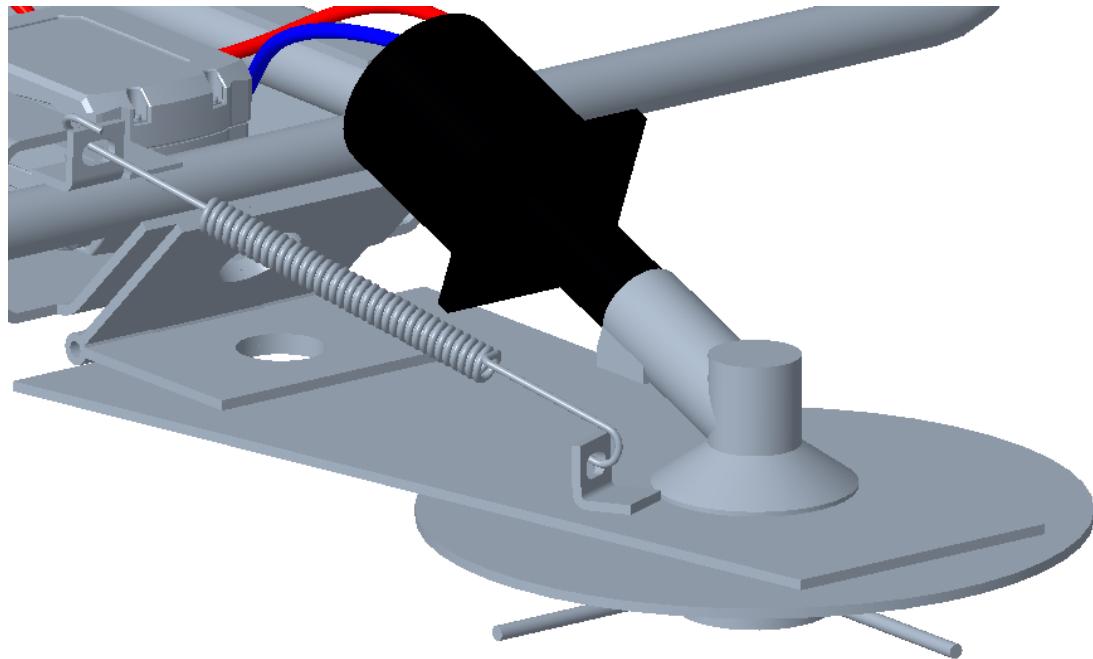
Cardboard Mechanical Design on Burley Trailer (Above)
